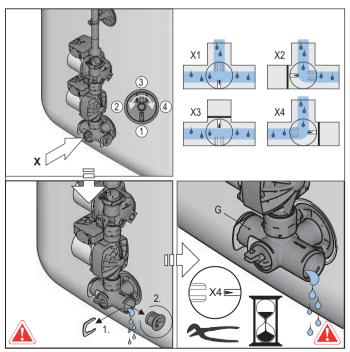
Shutting off the valve insert and removing the blanking plug from the connecting angle
